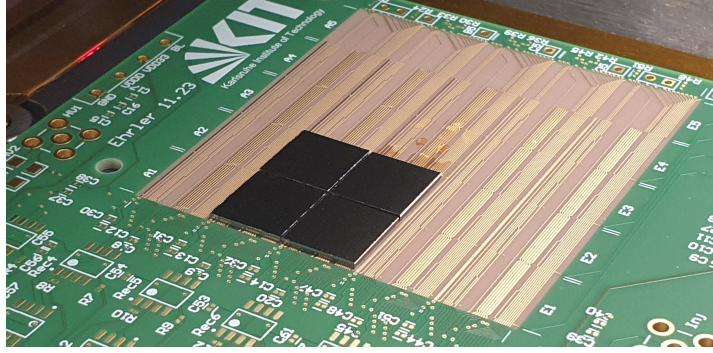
Four HitPix2 sensors assembled on the 5×5 bump-bonding PCB. Photo courtesy of M. Caselle.
